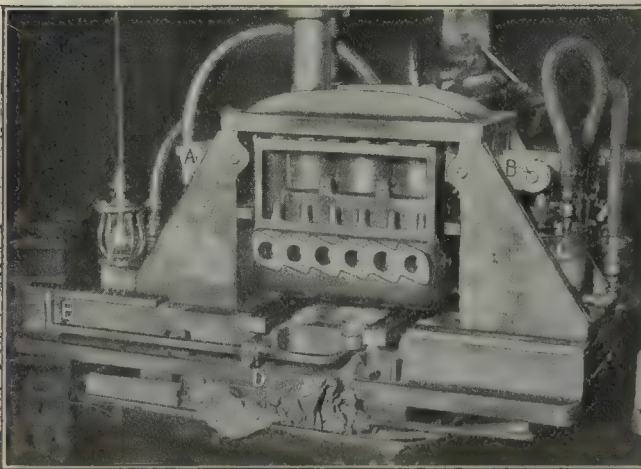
PNEUMATIC FIXTURE FOR FINISH-BORING
